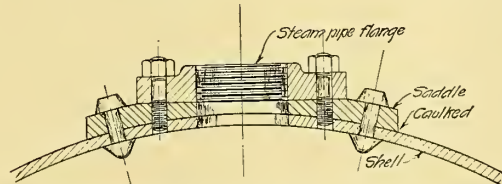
SADDLE BENT TO FIT SHELL AND PLANED TO RECEIVE PIPE FLANGE.
